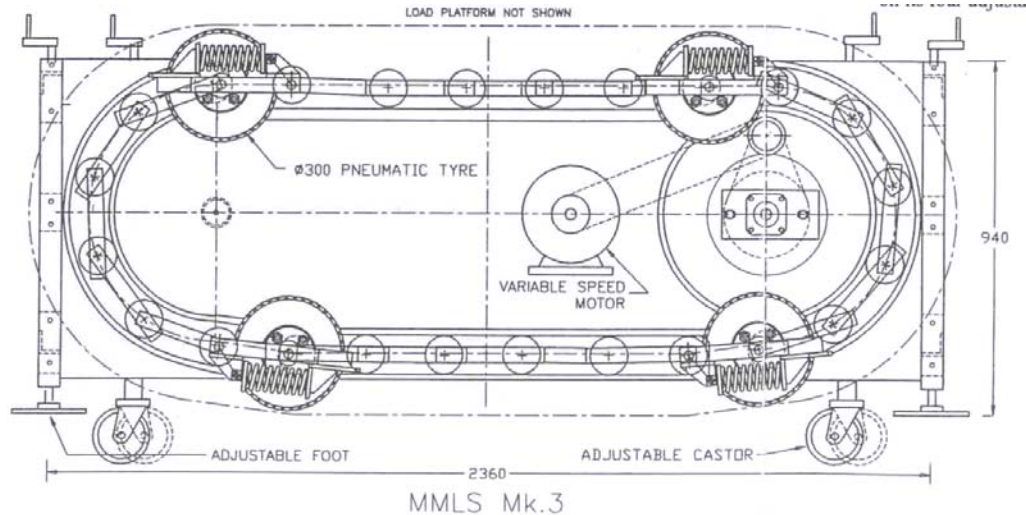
General Configuration of MMLS Mk3 Accelerated Pavement Testing
